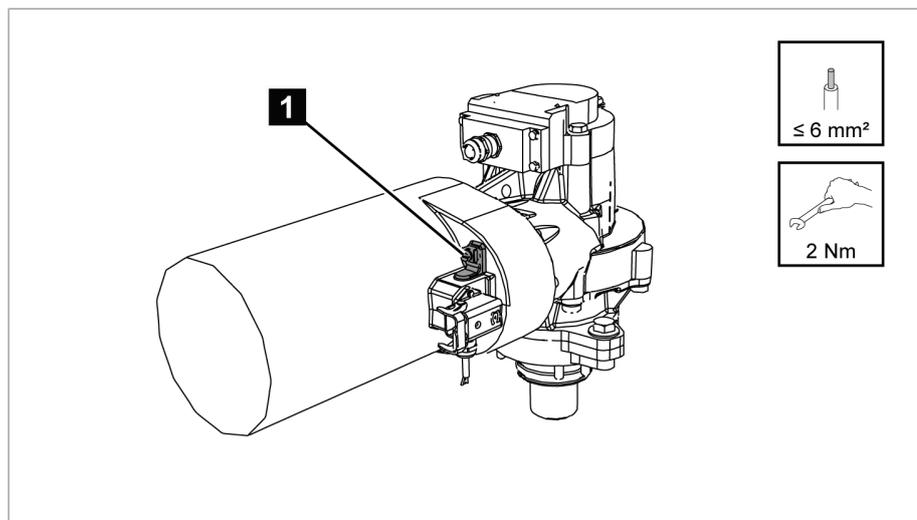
Connection of the grounding cable on the grounding bar of the gear motor
